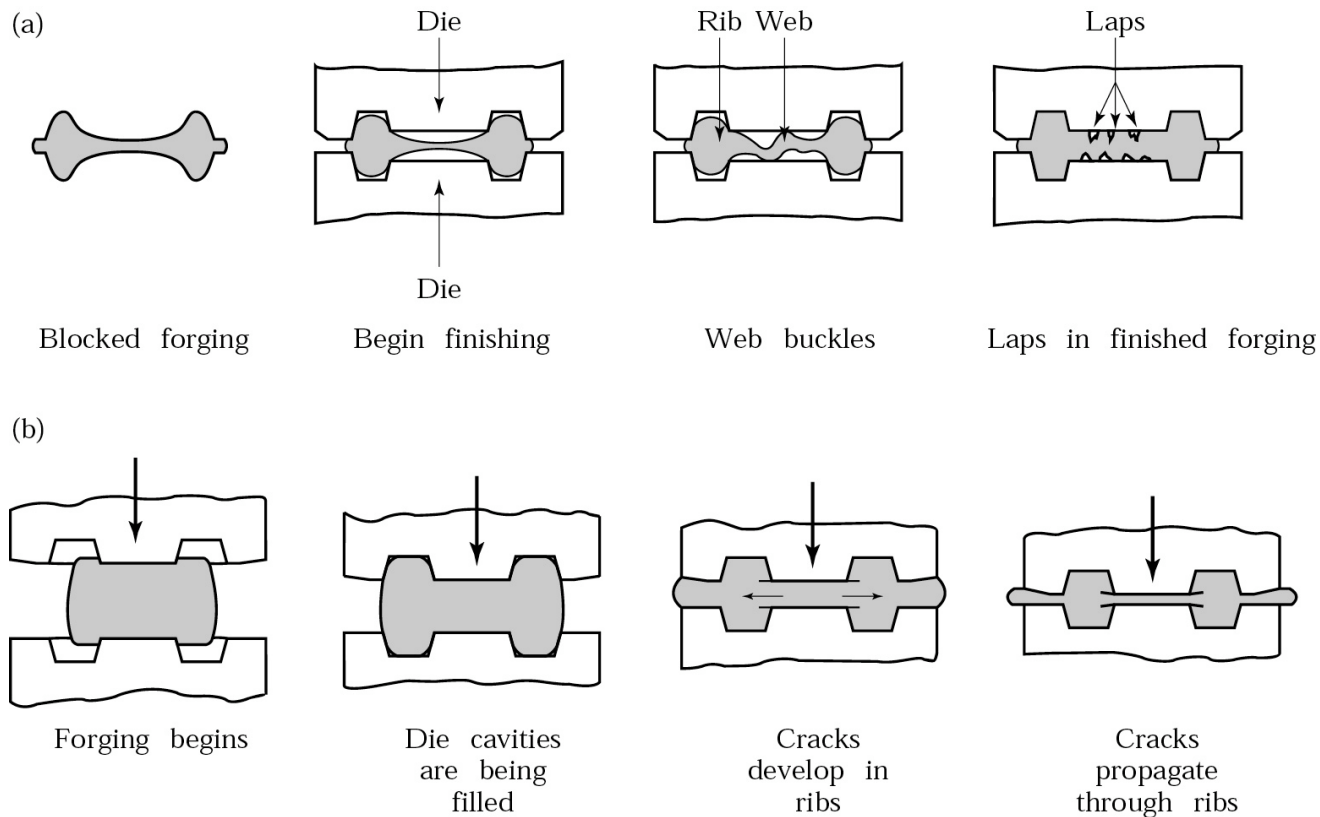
Examples of defects in forged parts. (a) Laps formed by web buckling during forging; web thickness should be increased to avoid this problem. (b) Internal defects caused by oversized billet; die cavities are filled prematurely, and the material at the center flows past the filled regions as the dies close.
